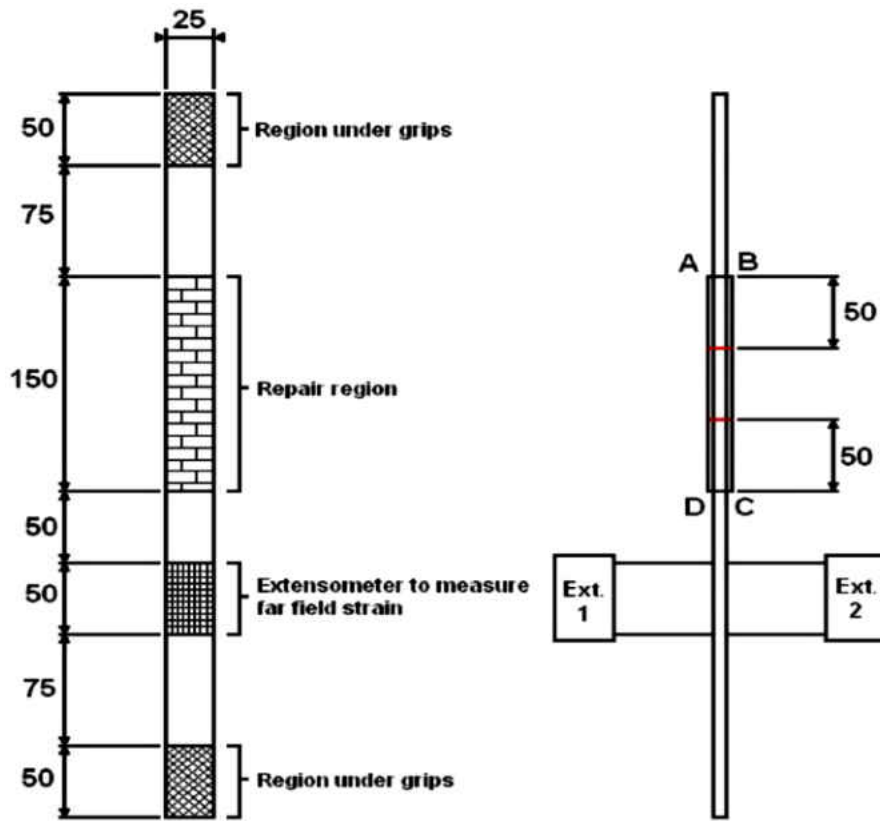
Experimental set-up of tension-tension fatigue testing (dimensions in mm)
